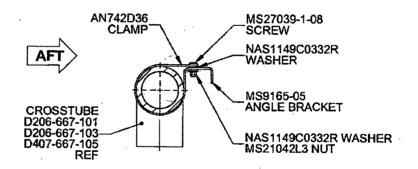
GROUNDING STRAP INSTALLATION (VIEW LOOKING FWD)
